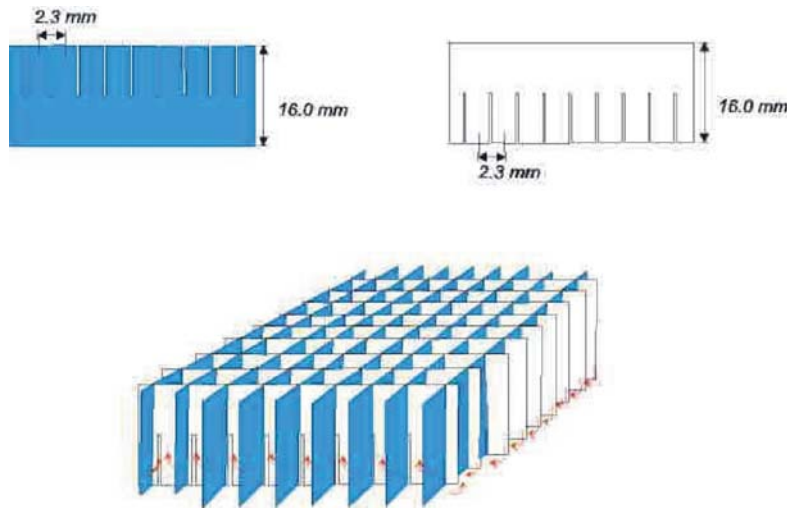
Sketch of the construction of a Tyvek matrix. The paper is cut in and assembled by using a brass mold (reproduced from S. Léonard).
